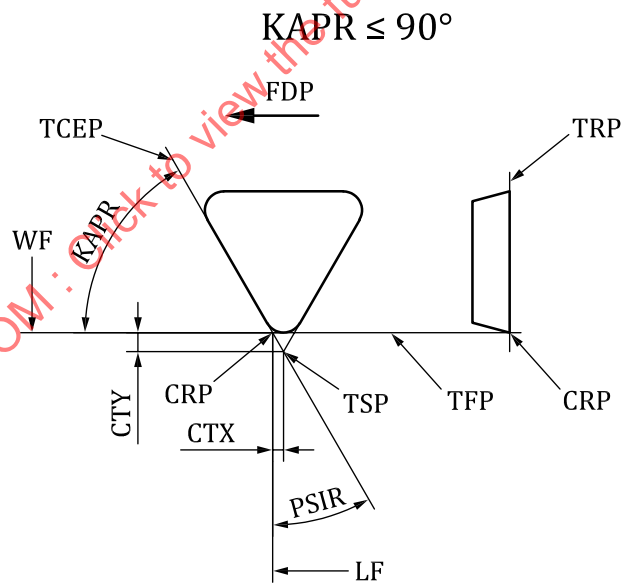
Feed direction parallel to tool axis — $KAPR \leq 90^\circ$
